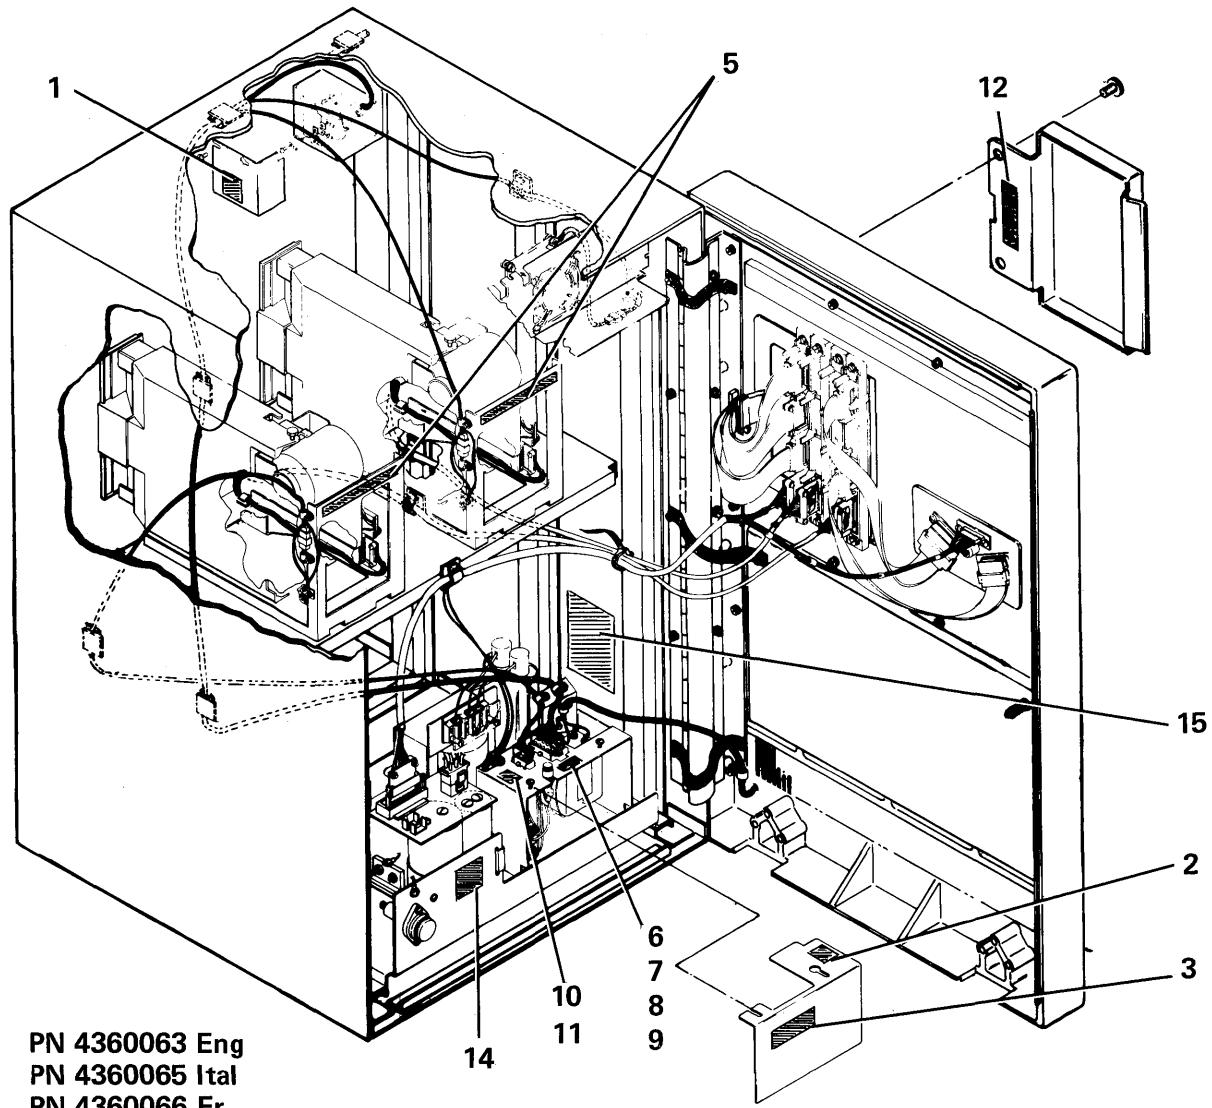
COVER ASSEMBLY. SEE LIST 19.
